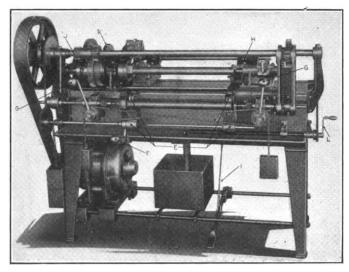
The Foster Bolt Centering Machine Which Centers and Points the End and Face Under the Head of the Bolt
